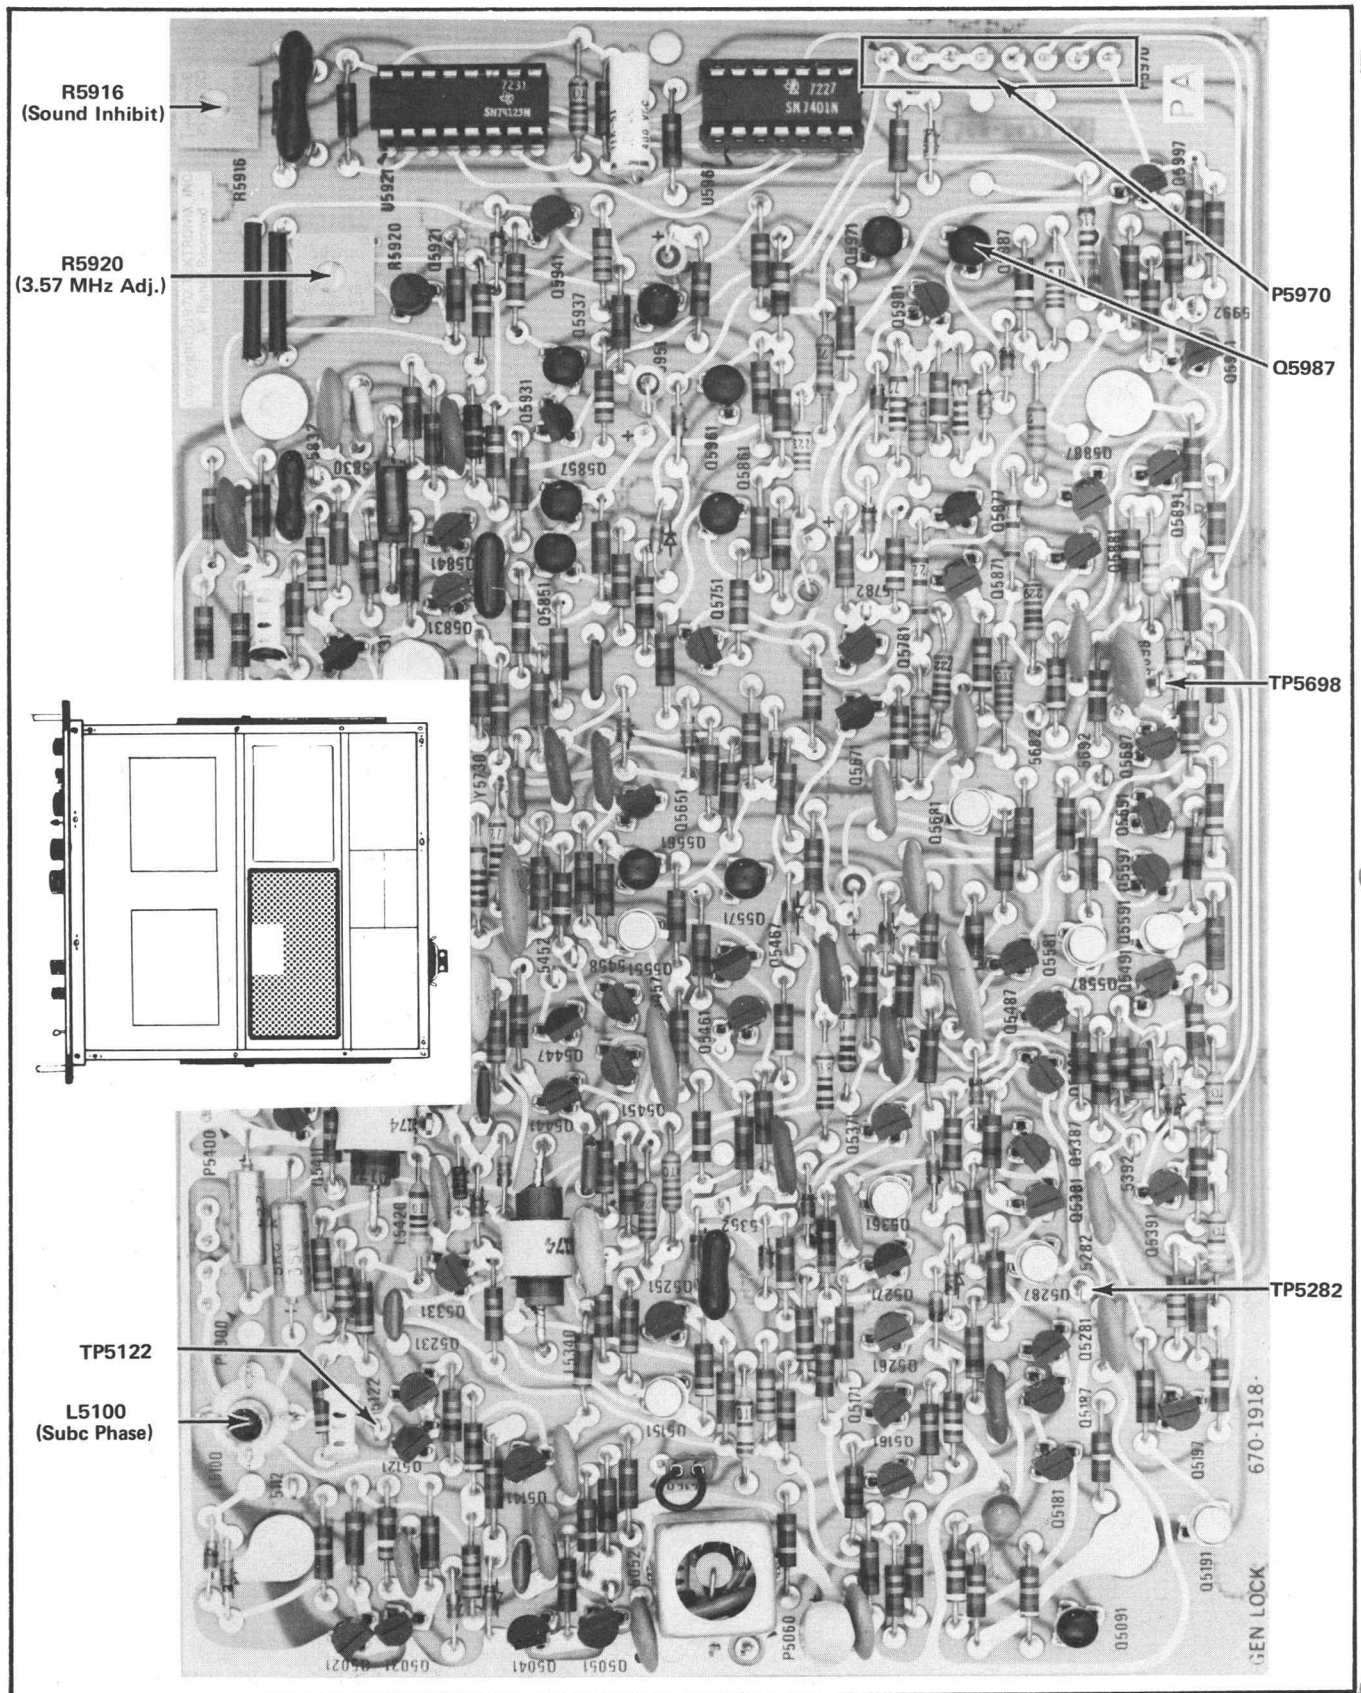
Gen Lock test point, pin connector, and adjustment.
